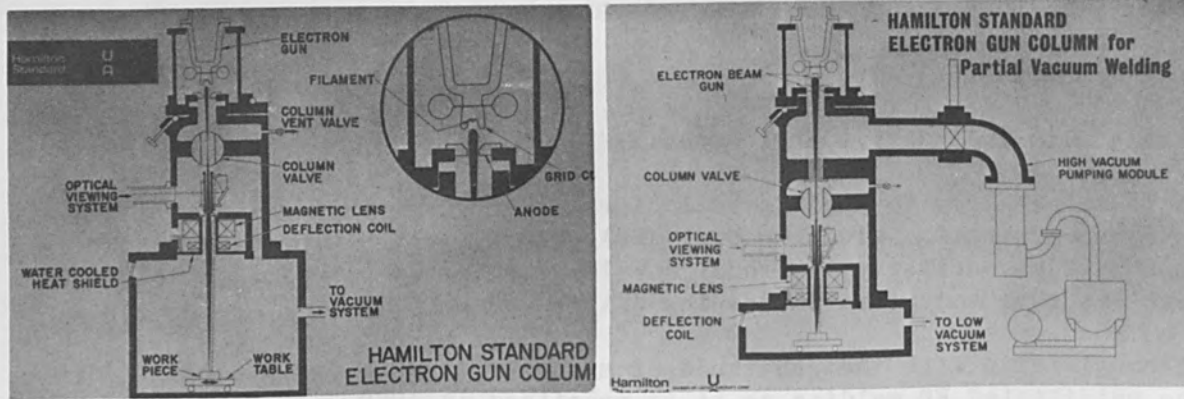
Schematics of EB welding machines. (Courtesy: Hamilton Standard.)
